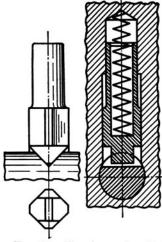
The plunger is milled square with round corners and the hole is partly broached; this does away with the necessity of a key. The point is flat milled.
